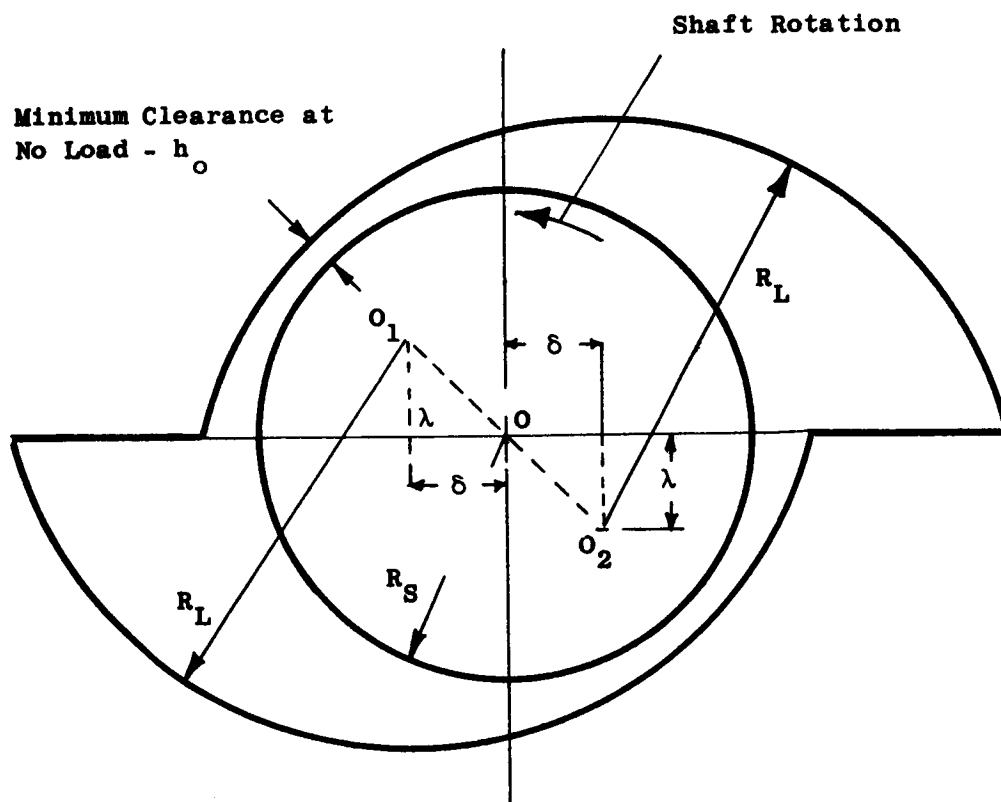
Displaced Cylindrical Bore of Bearing Segment
